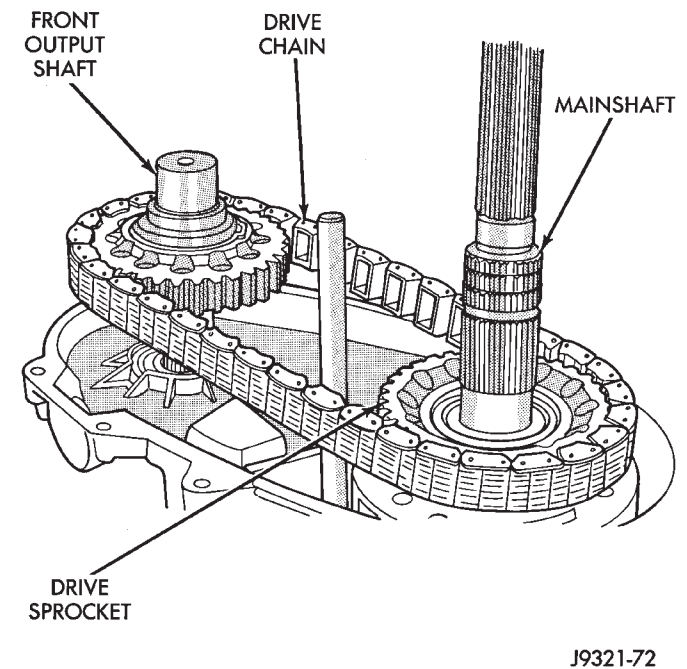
Installing Drive Chain, Front Output Shaft And Drive Sprocket
